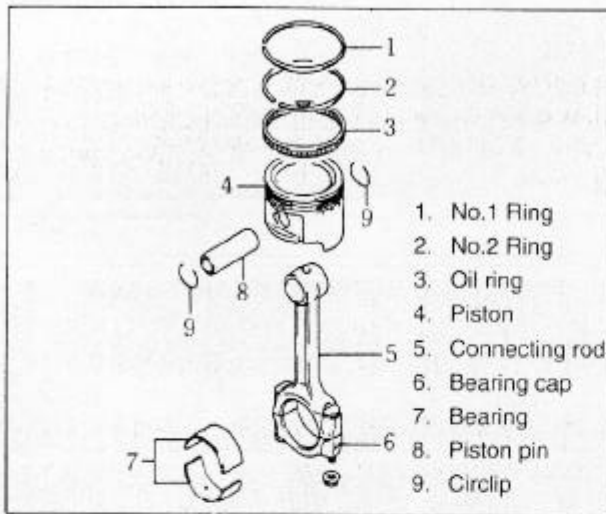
A — 75 DISASSEMBLY OF PISTON AND CONNECTING ROD
